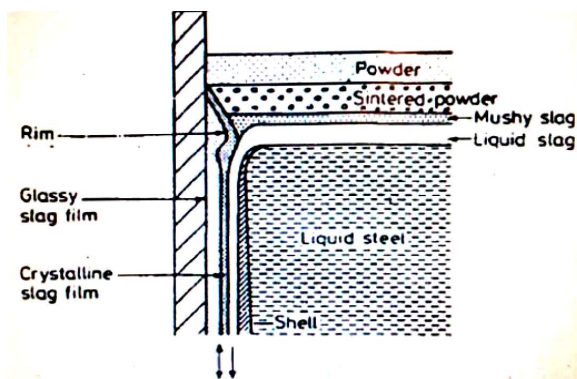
Representation of the continuous steel casting mold (the copper mold)
